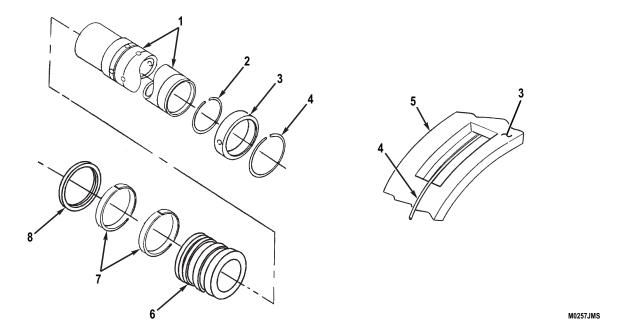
Hydraulic Lift Cylinder (with Side Lift Kit) Disassembly.
